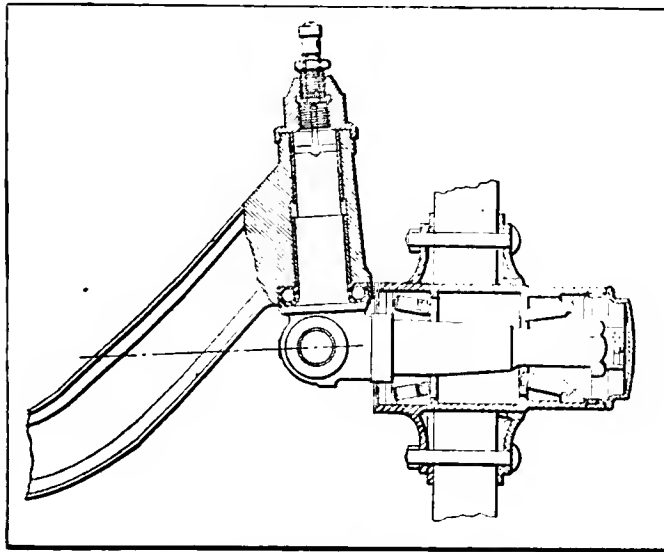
Lemolne type of steering knuckle with Timken roller bearings and a ball thrust
